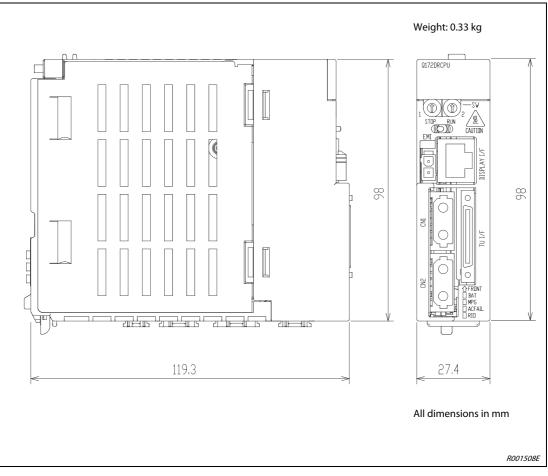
Dimensions of robot CPU Q172DRCPU
